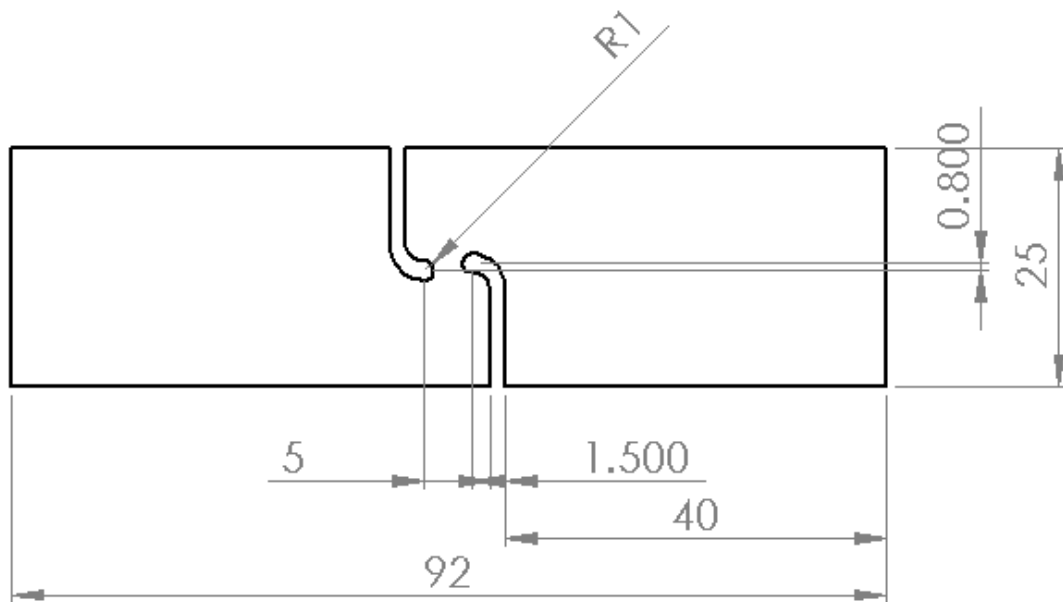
Technical drawing of Peirs shear specimen modified for production at WMG
